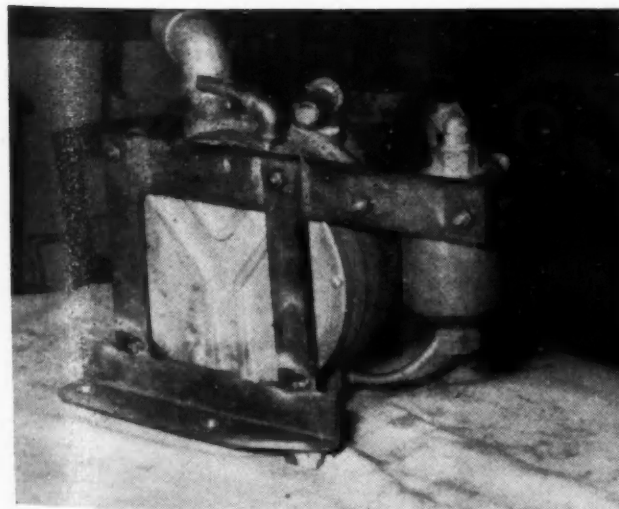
Below. Mounting bracket for vaporizer and filter made from angle and strap iron and bolted to head near carburetor. Fig. 5. Below right. Vaporizing equipment is clustered, located out of way of other units for easier servicing
